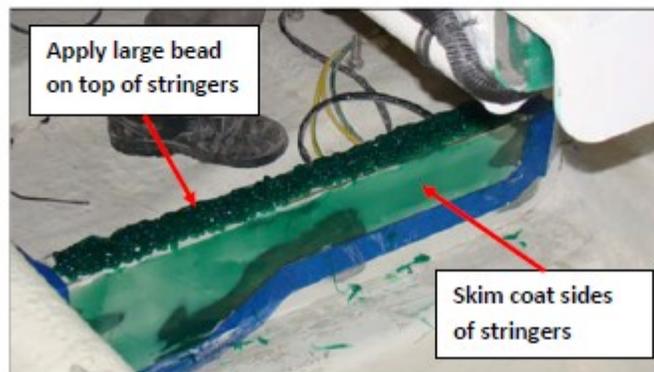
APPLYING ADHESIVE TO STRINGERS
